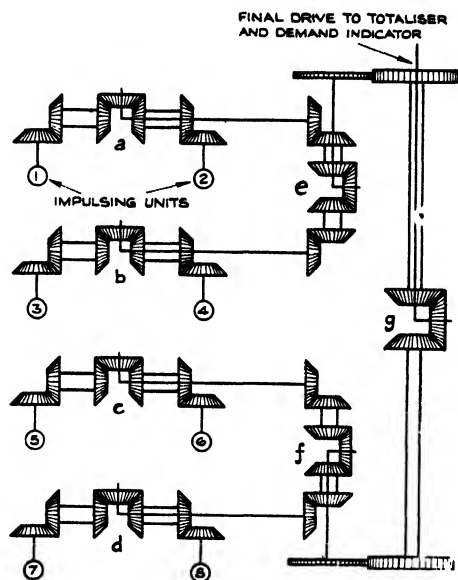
Arrangement of differential gears in Ferranti eight-element summator.
